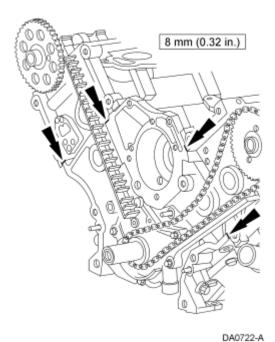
Applying Bead Of Silicone Gasket And Sealant Along Cylinder Head-To-Cylinder Block Surface
